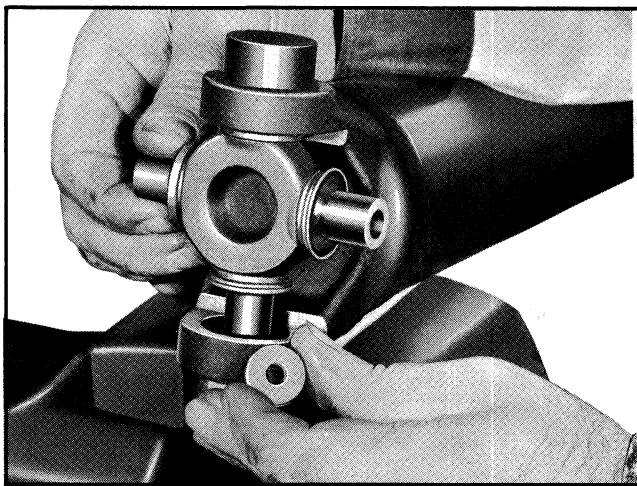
A-7 Placing Washers Inside Bearing of Fixed Yoke Member
